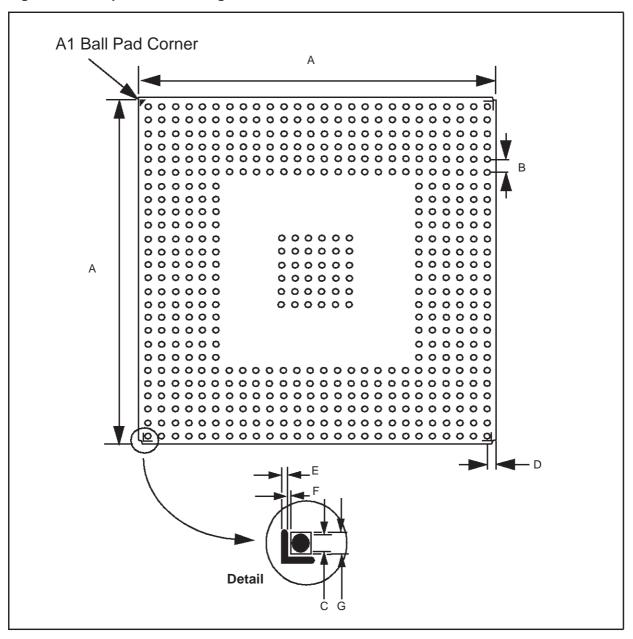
516-Pin	PBGA	Package	- Top	View
